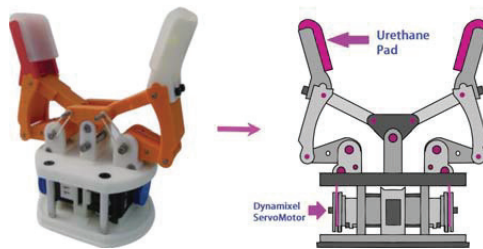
Internal gripper assembly. Reprinted with permission from ref. [12]. Copyright 2016 IEEE.
